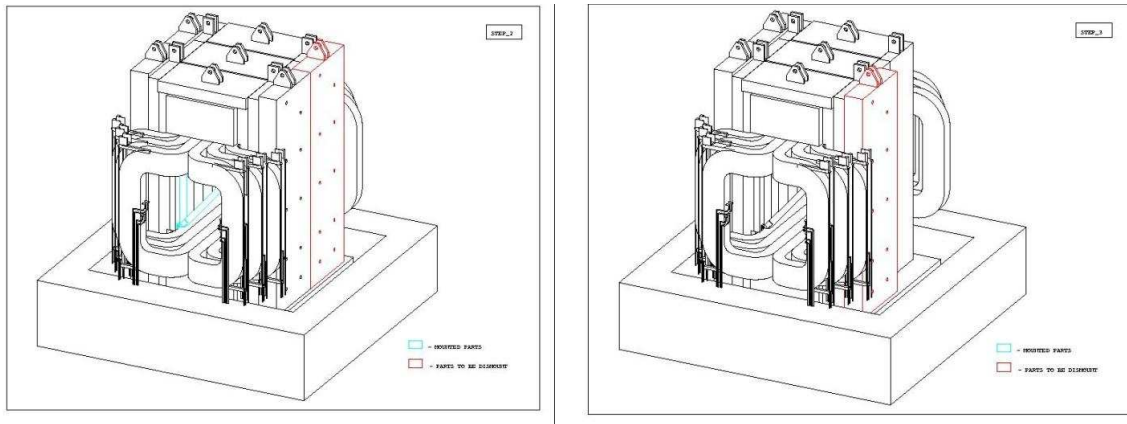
SM3 Analysis Magnet disassembly steps 3 (left) and 4 (right)
